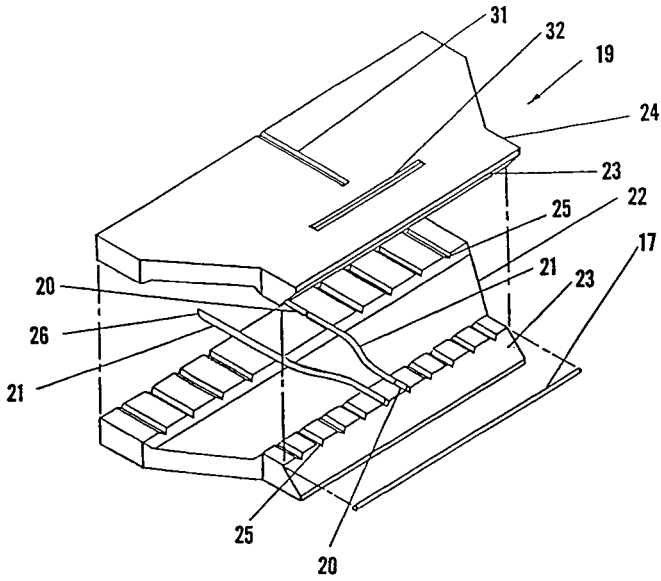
Exploded view of parallel fiber connector using V-groove alignment [77].
